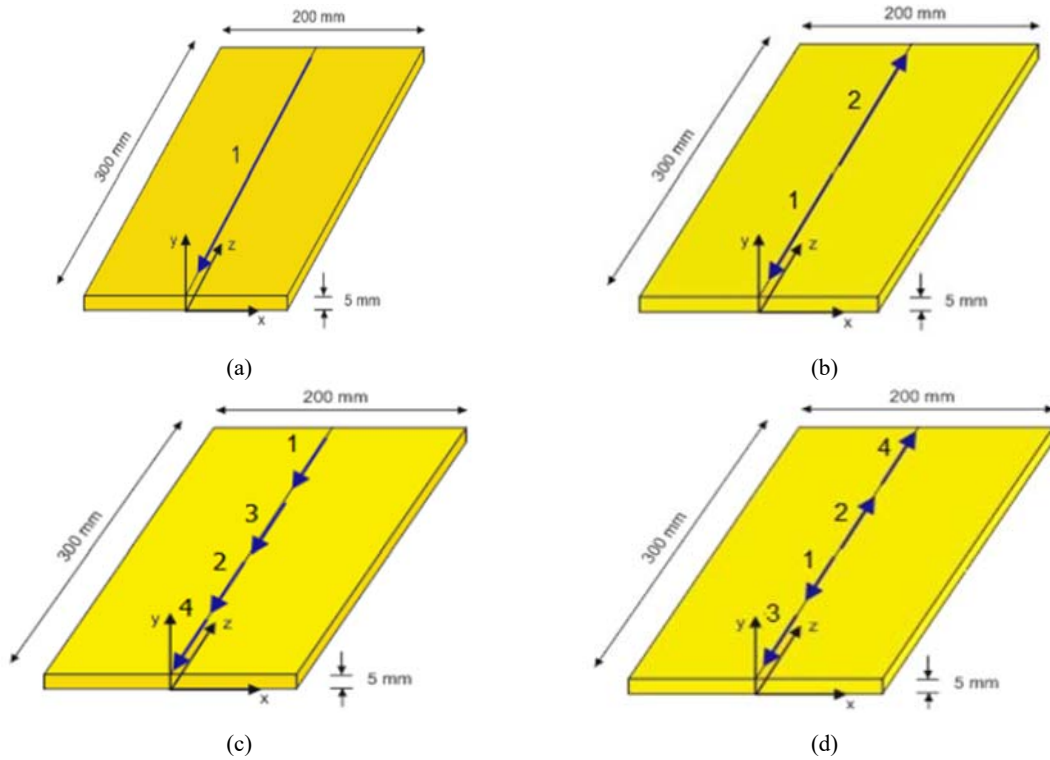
(a) How to move the weld in a straight state, (b) How to move the weld in a symmetrical state, (c) How to move a weld in a discontinuous state, (d) How to move a weld in a discontinuous-symmetrical state
